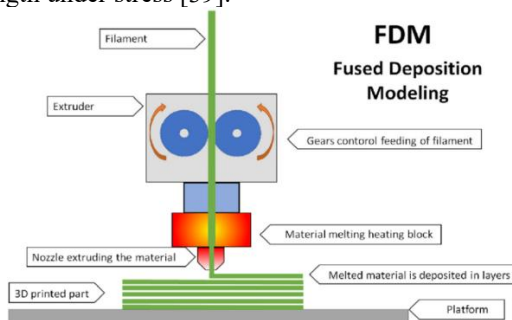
A diagram of the 3D printing process using the FDM technique [40]
